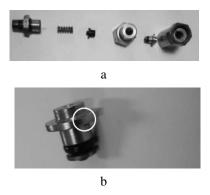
a - Typical setup of a disassembled pressure safety valve; b - Upper disc containing edge crack (in circle).
